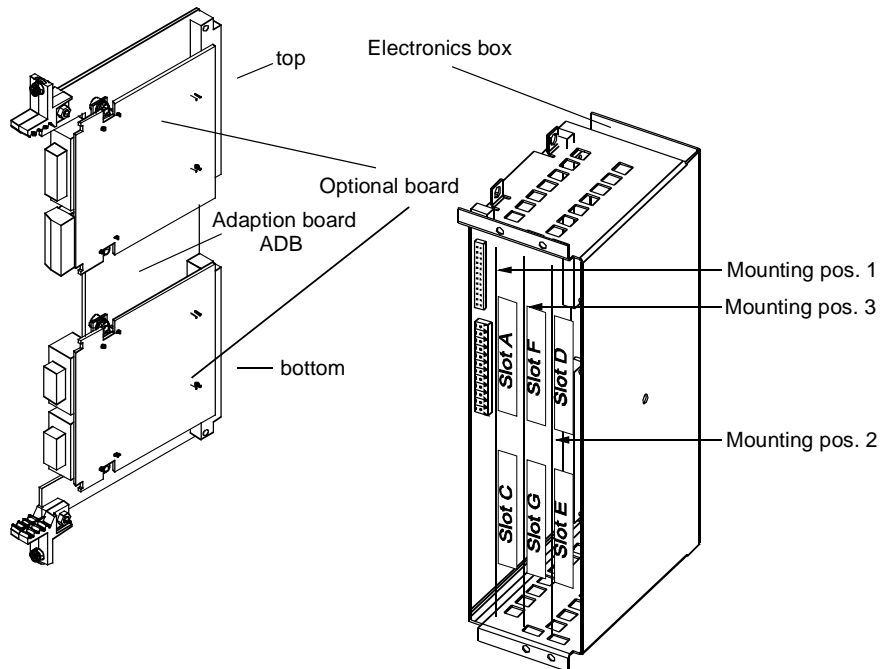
Adaptation board with optional boards and position of the slots for Compact units and chassis-type units
